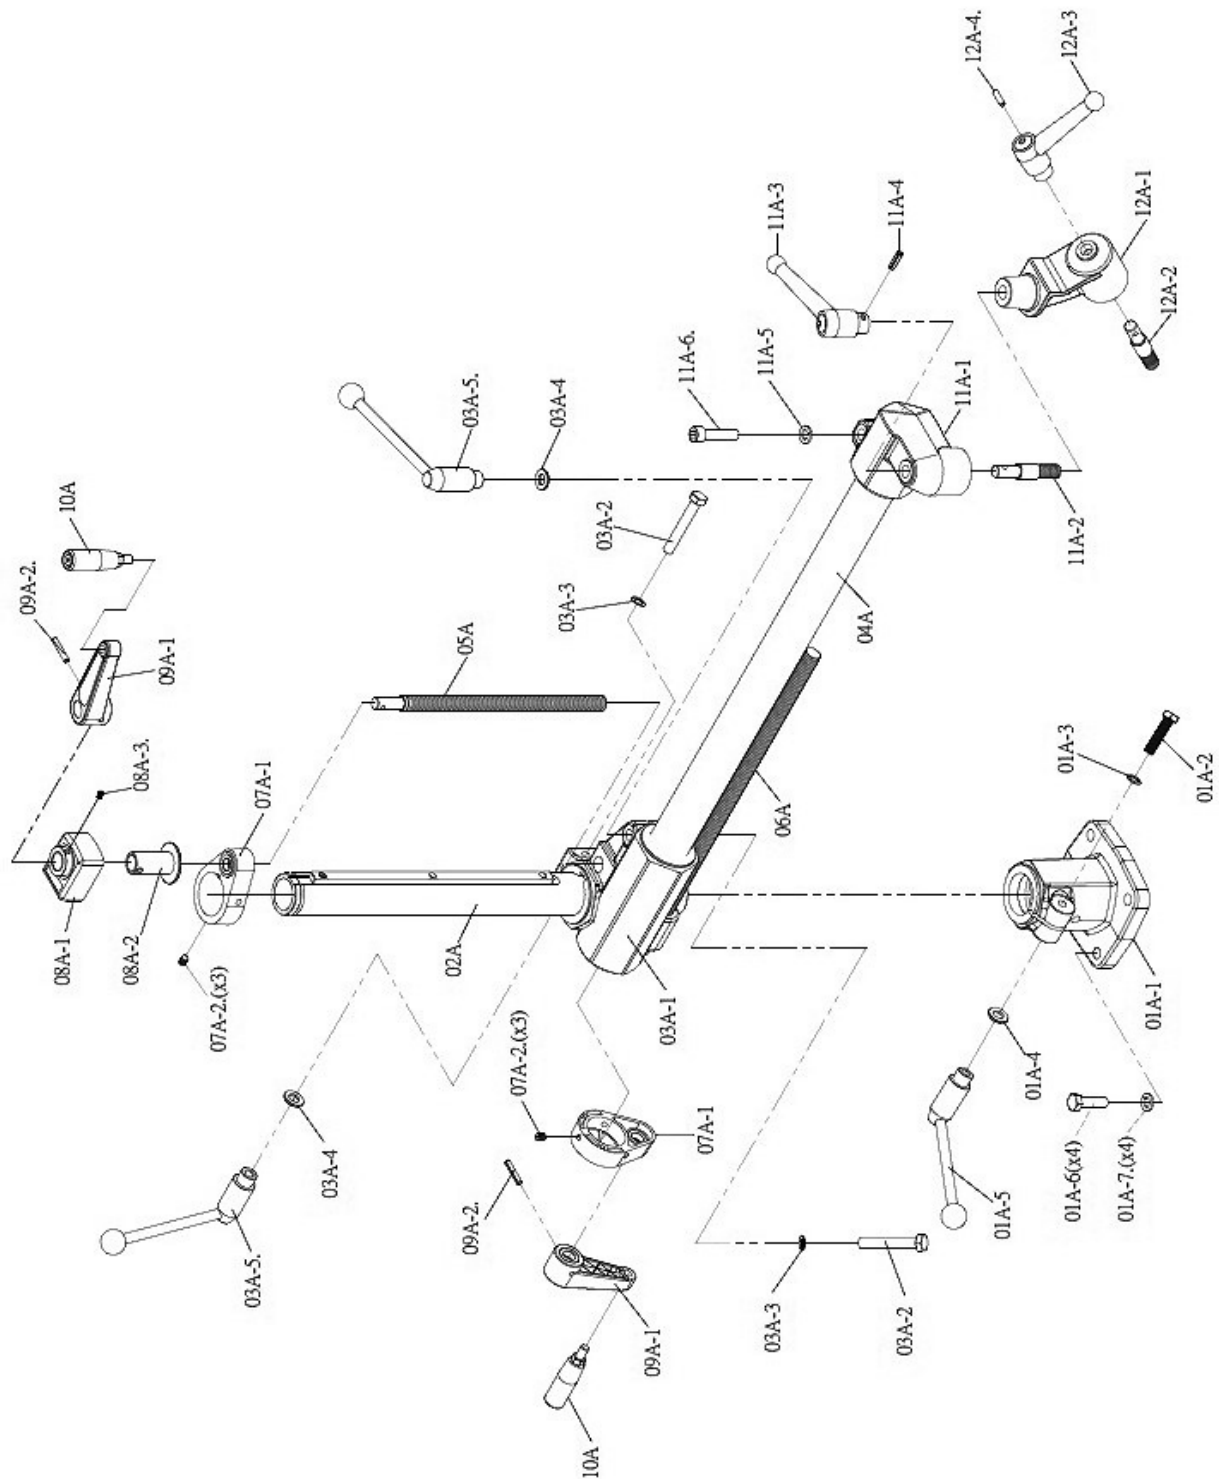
Spare parts drawing 2 - tripod of feed unit VSA 308
